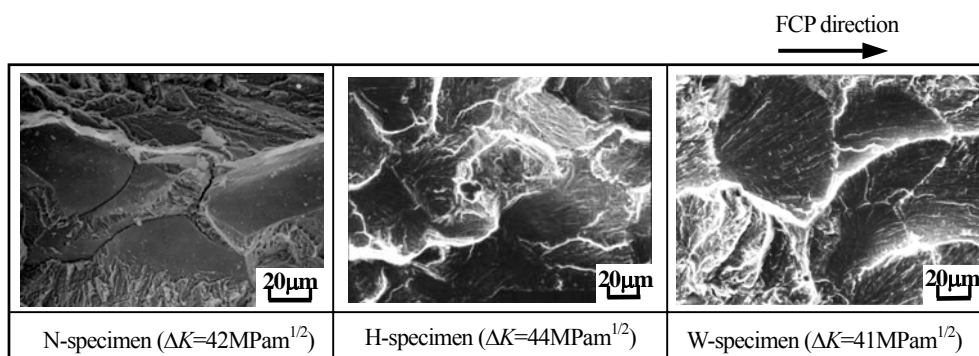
Fracture surface appearance of welded specimens in the FCP regime enhanced by 3%NaCl solution.
